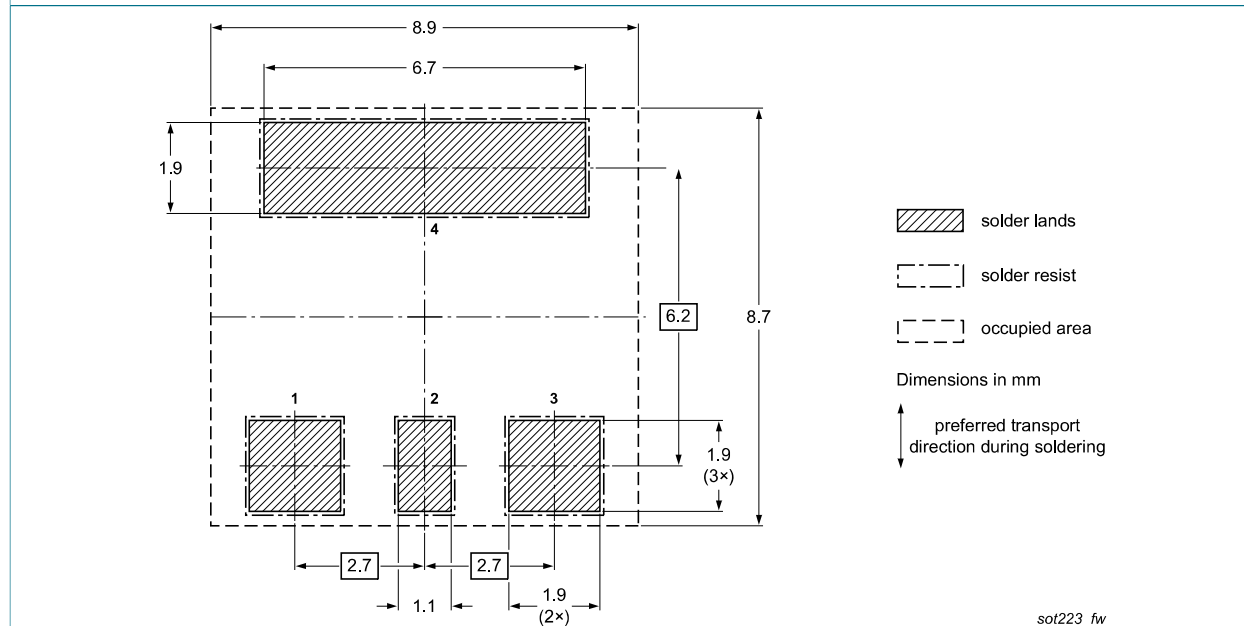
Wave soldering footprint for SC-73 (SOT223)
